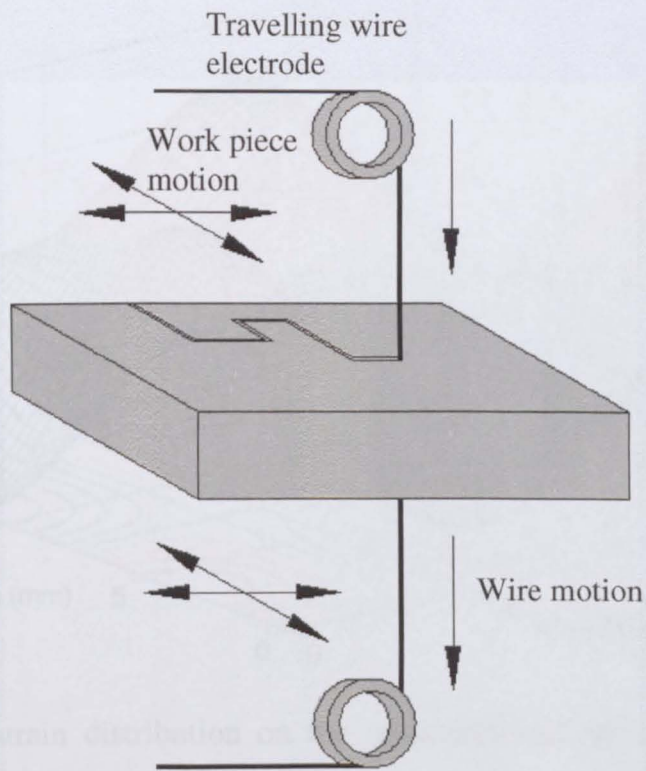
Wire Electrical Discharge Machining (EDM)
